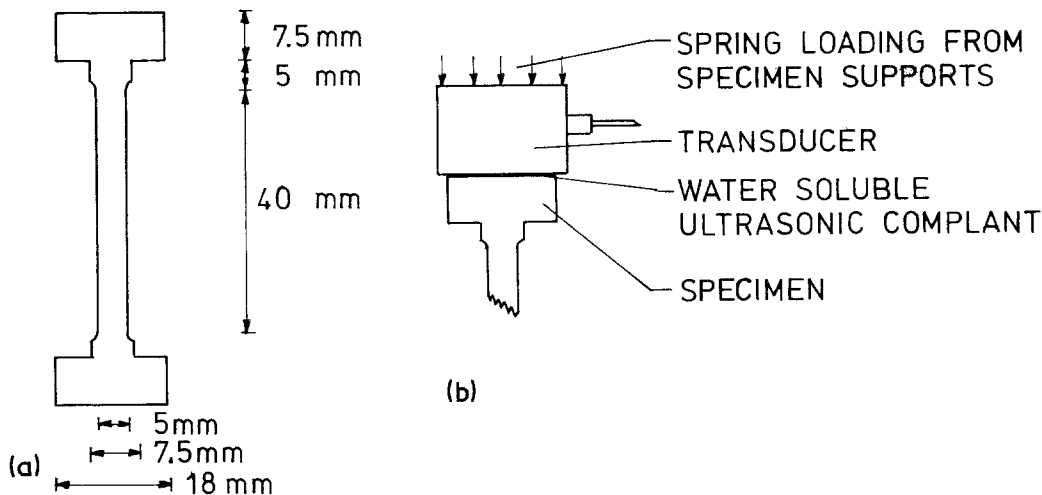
(a) Dimensions of test specimen. (b) Connection of transducer to specimen head.
